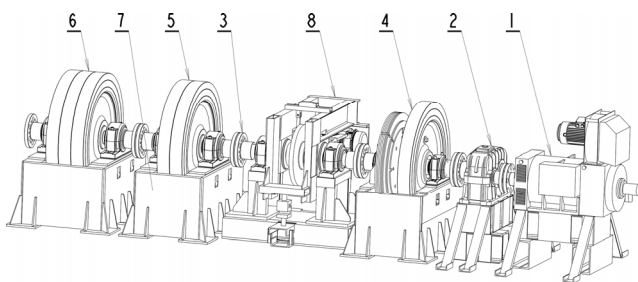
The scheme of UIC flywheel test bench of University of Žilina
